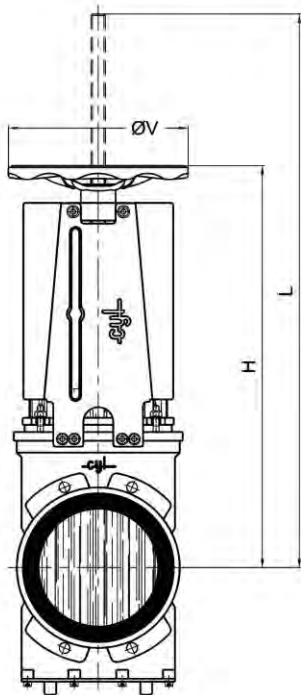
KGV SK series semi lugged rising stem with handwheel & gearbox
